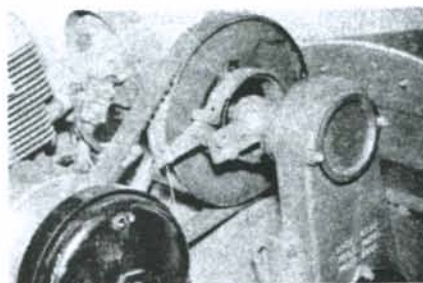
View of torque converter drive unit, brake & chain case with hood removed.
